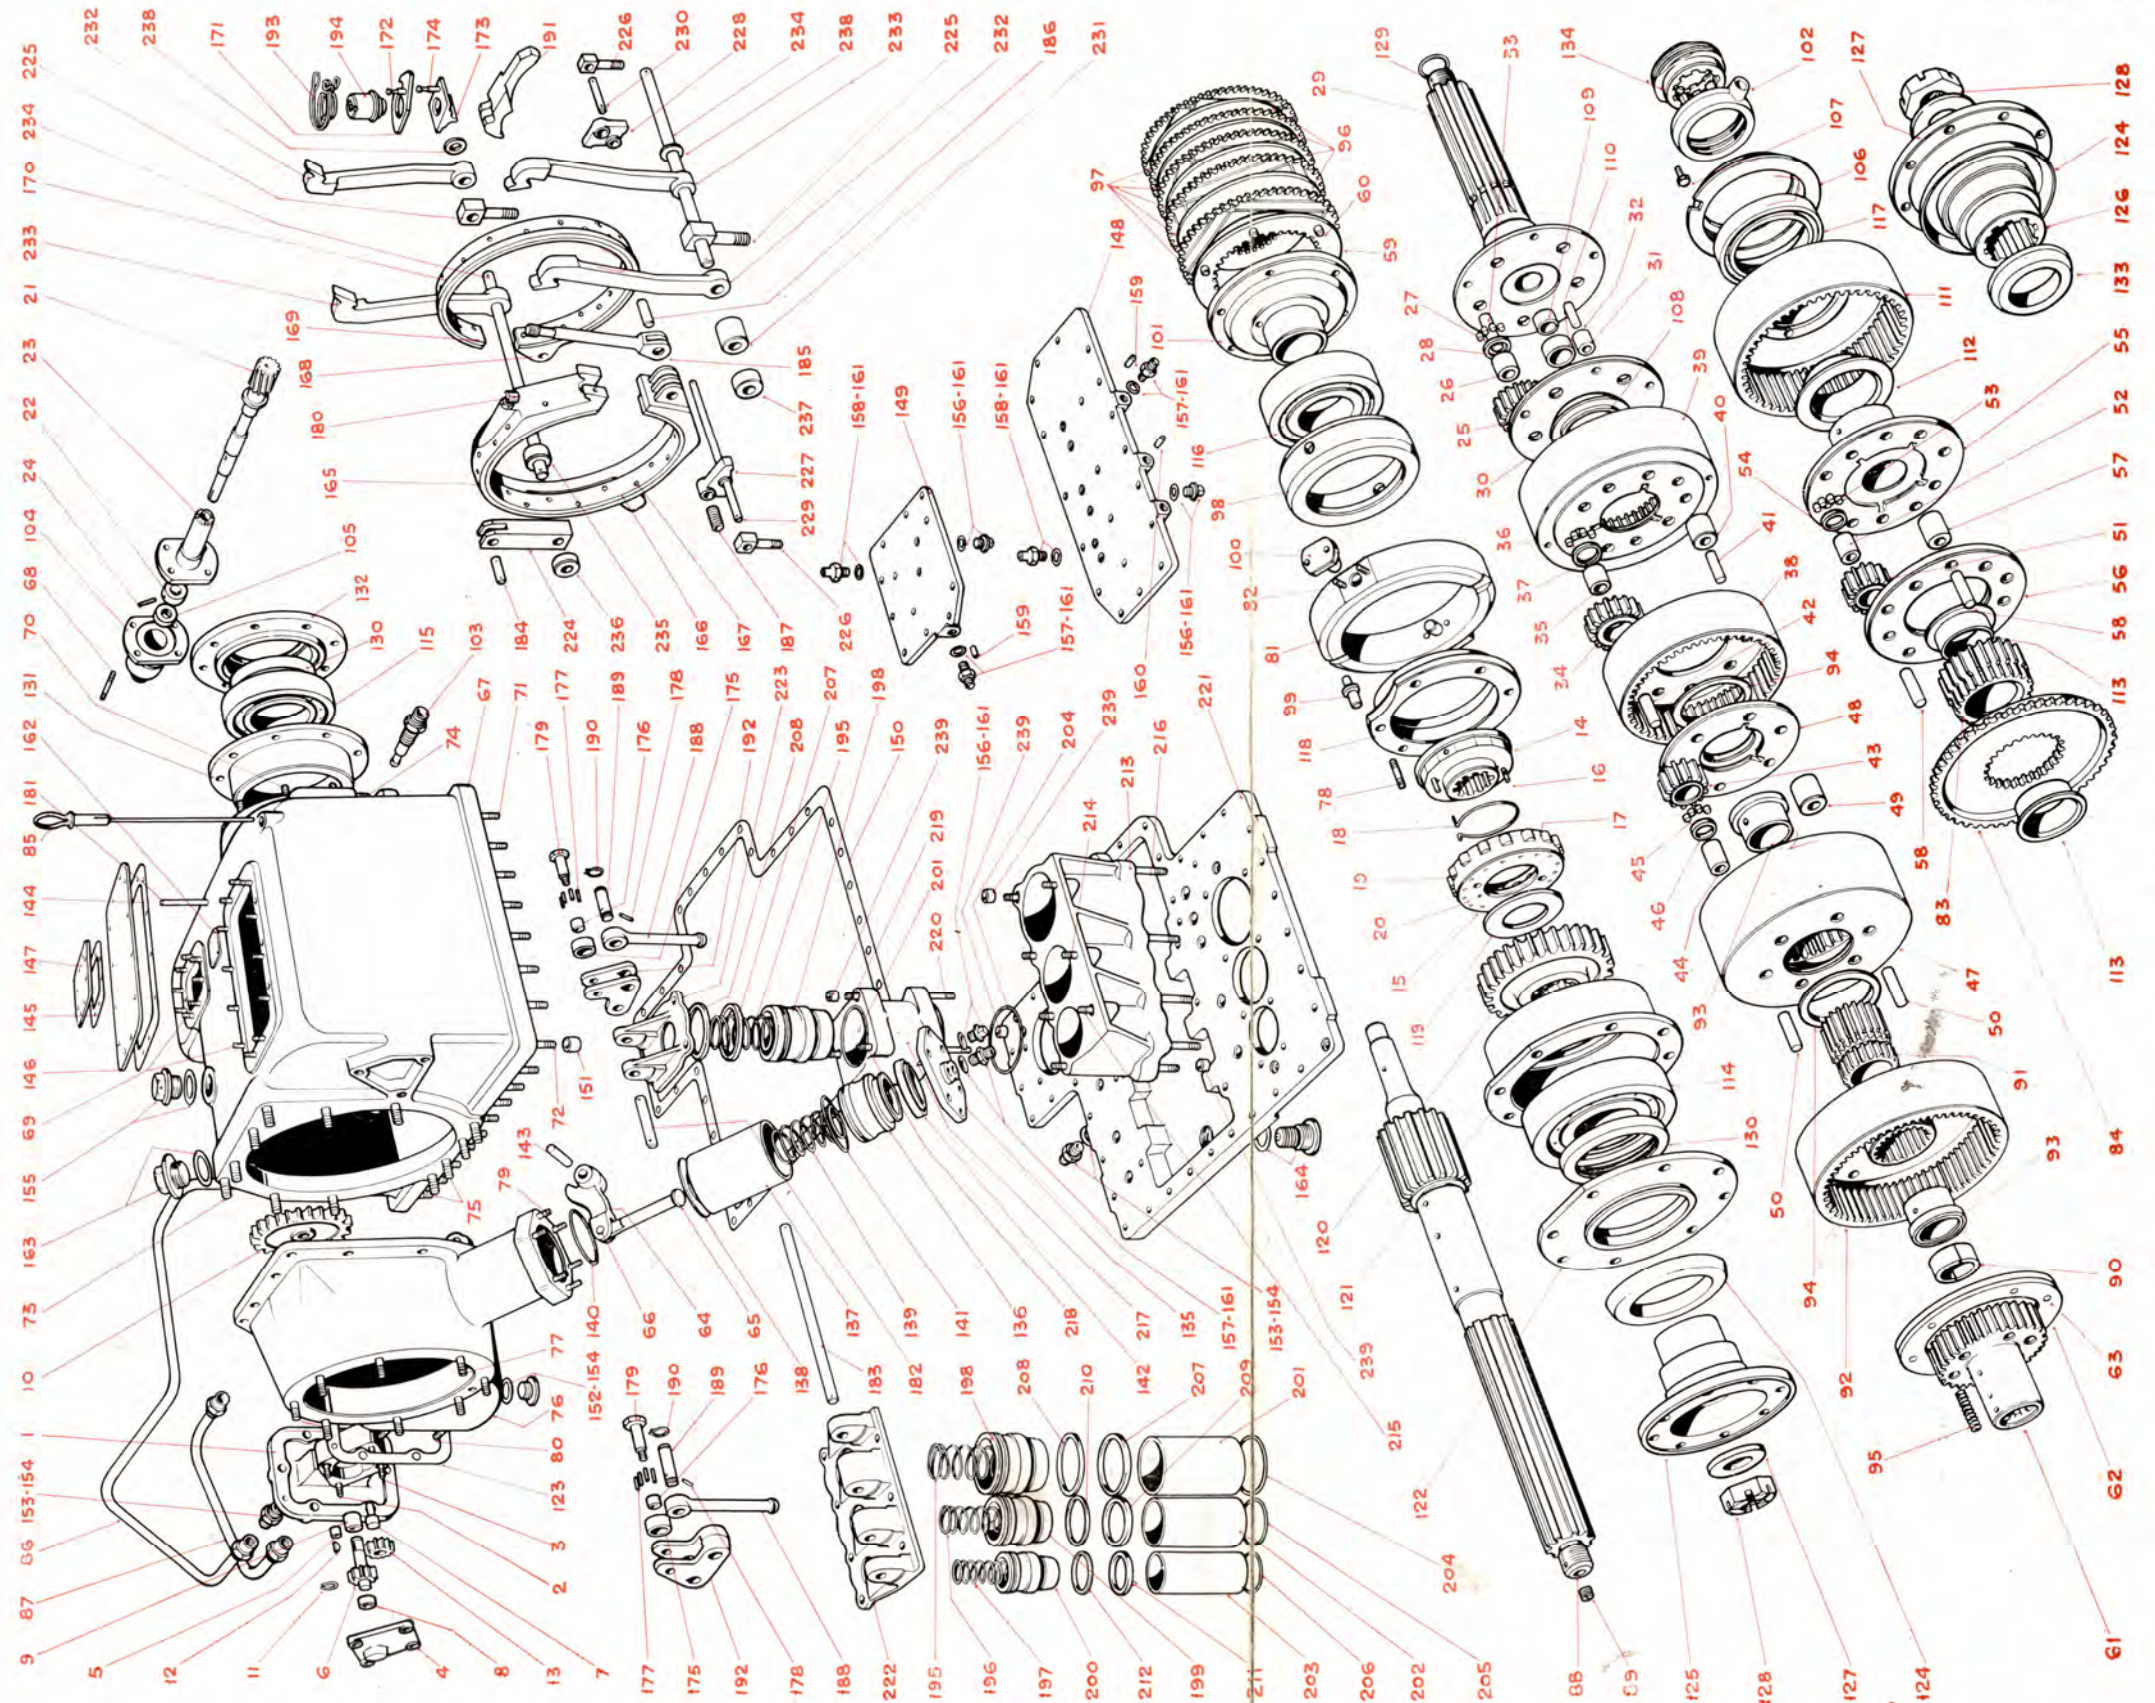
EXPLODED VIEW OF THE GEARBOX
